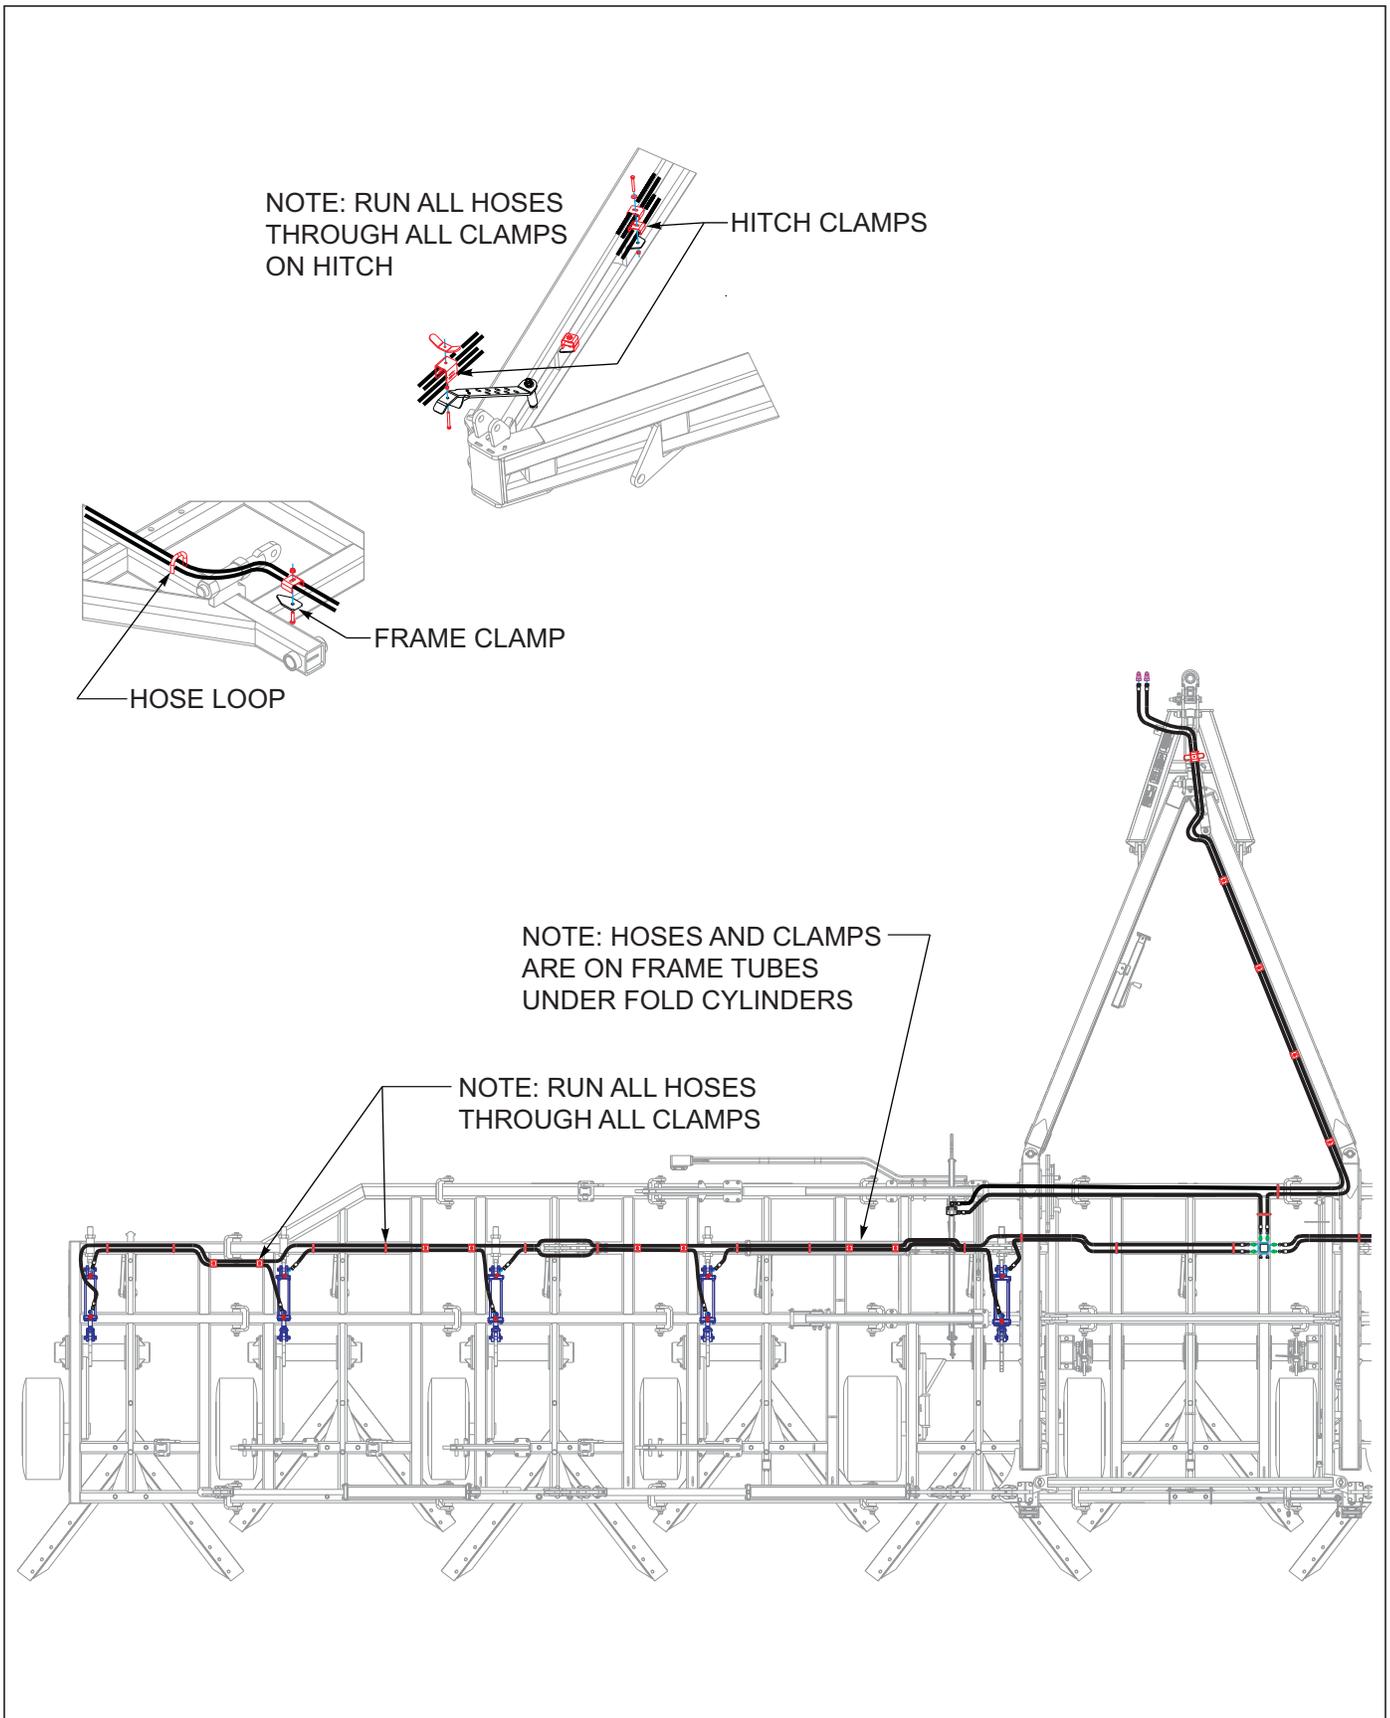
Lift Hydraulic Placement RH 1790-52'
